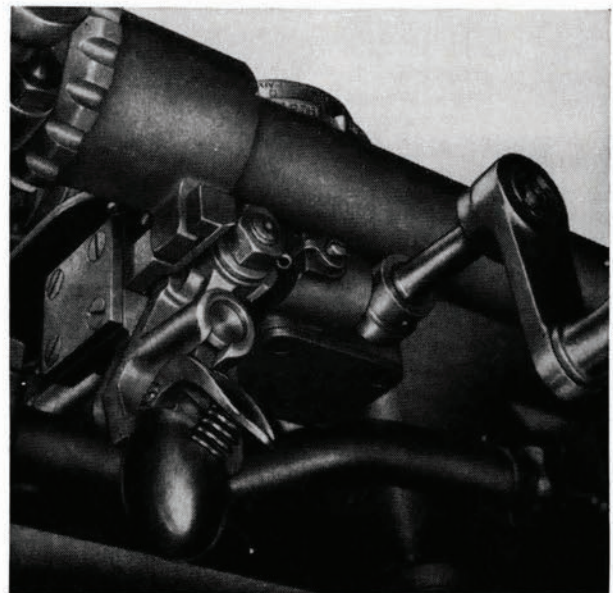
Depth Setting Mechanism Installed—Right-Hand Tube. Spindle IN.
